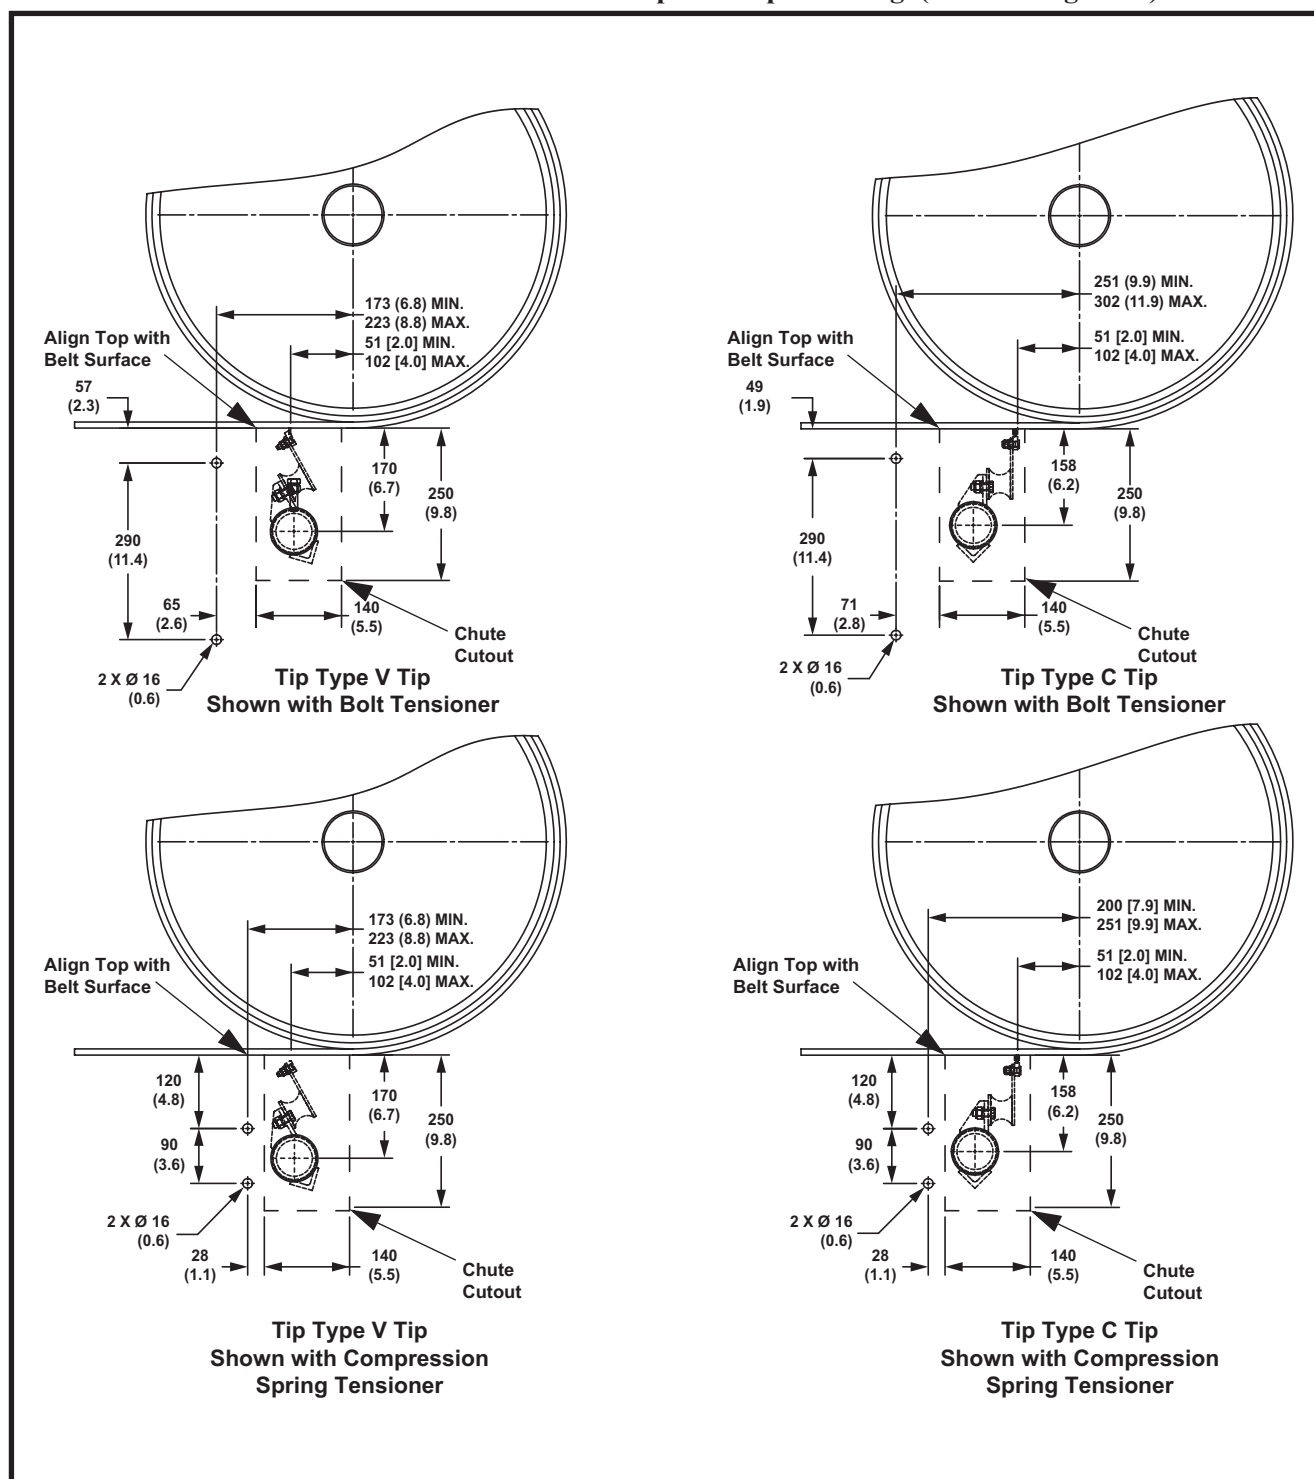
Martin® P2 Secondary Belt Cleaner HD Mainframe & Chute Cutout Location
